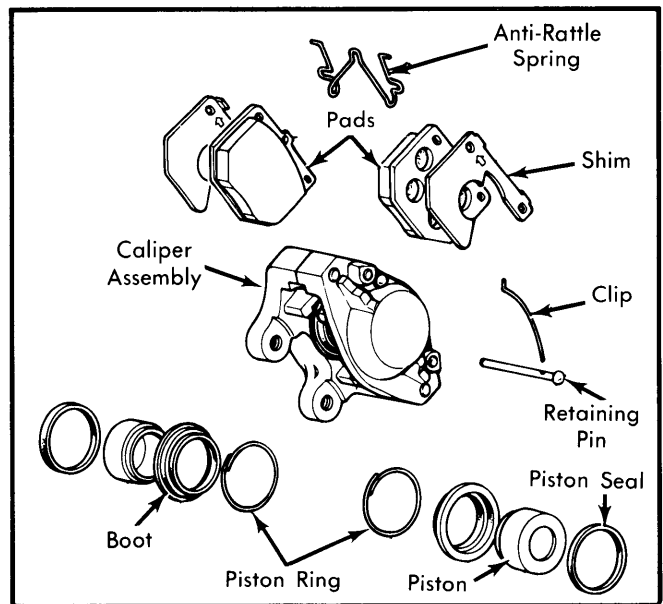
Exploded View of "K" Type Disc Brake Used on Cab and Chassis Pickup
